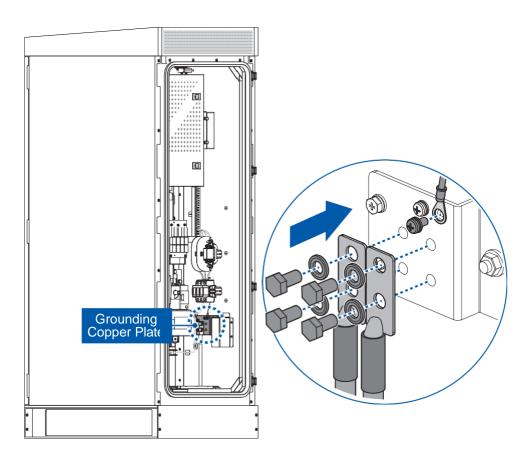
Grounding Cable Connection with Grounding Copper Bar
